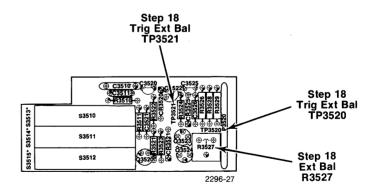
Horizontal Deflection Board and Trigger Switch Board
